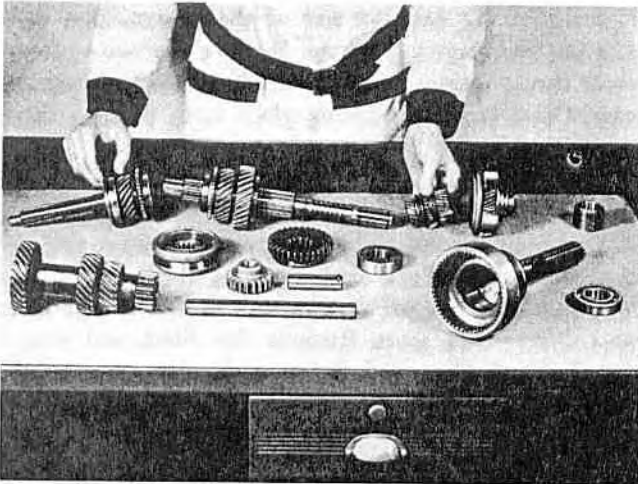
Inspecting the Gears, Shafts, and Bearings
